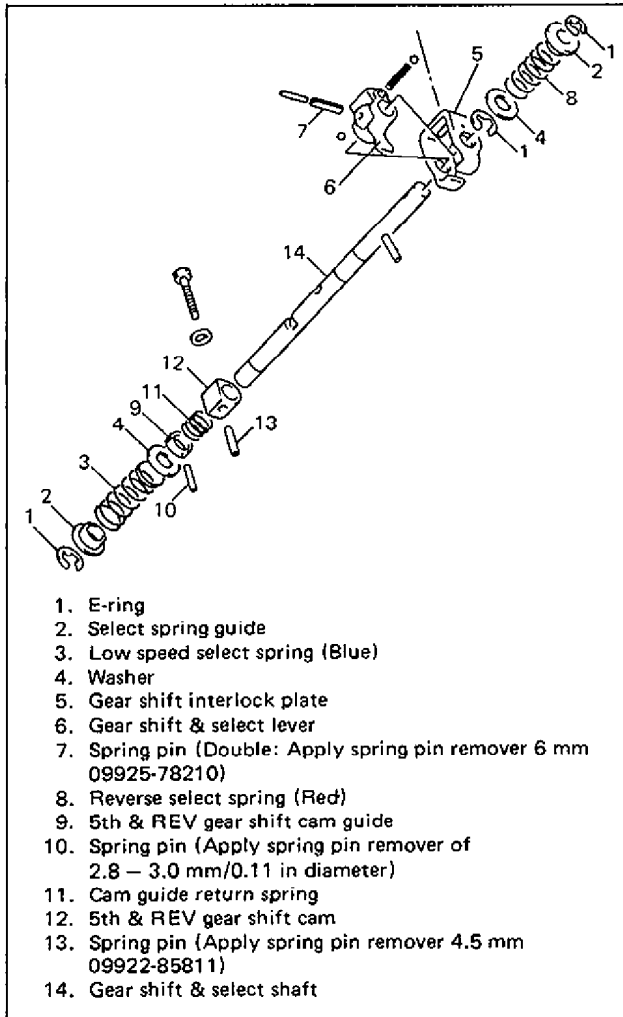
A-61 Gear Shift &amp; Select Shaft Assembly
